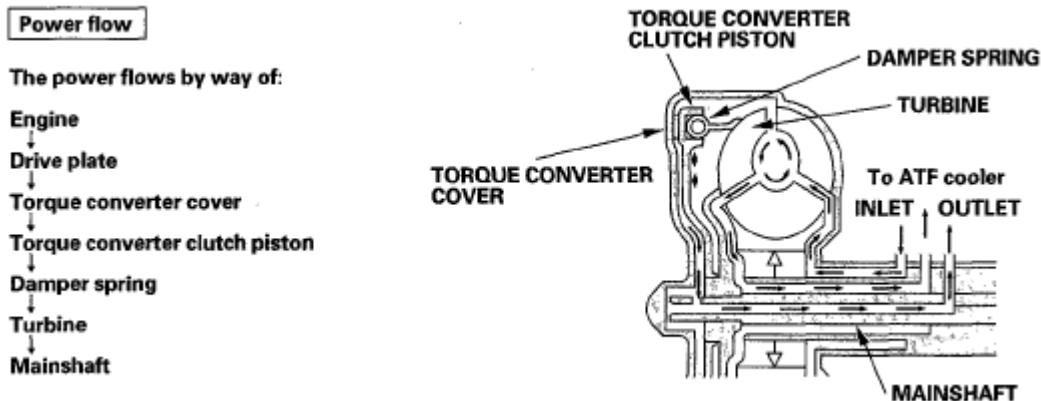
Power Flow Diagram (Torque Converter Clutch Lock-Up On (Engaging Torque Converter Clutch))
